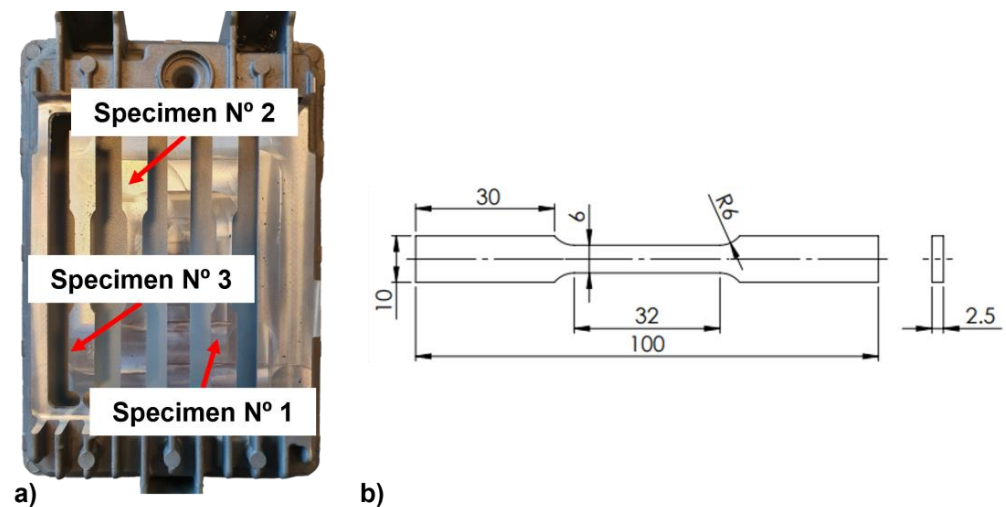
(a) Positioning of the specimens on the part, (b) Subsize specimen dimensions in millimetres.
